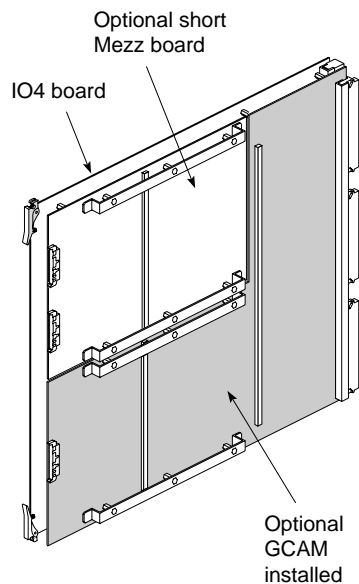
VCAM- and GCAM -Equipped IO4 Boards
